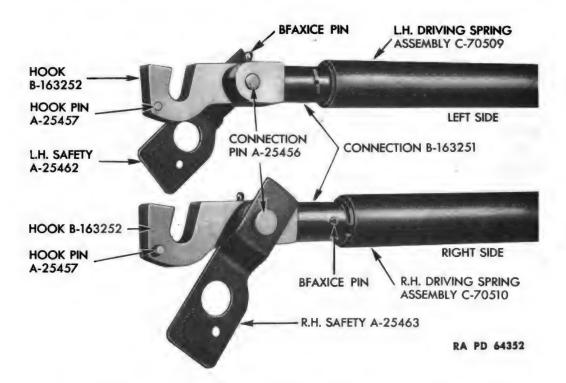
Correct Assembly of Hook, Safety, and Cotter Pins
